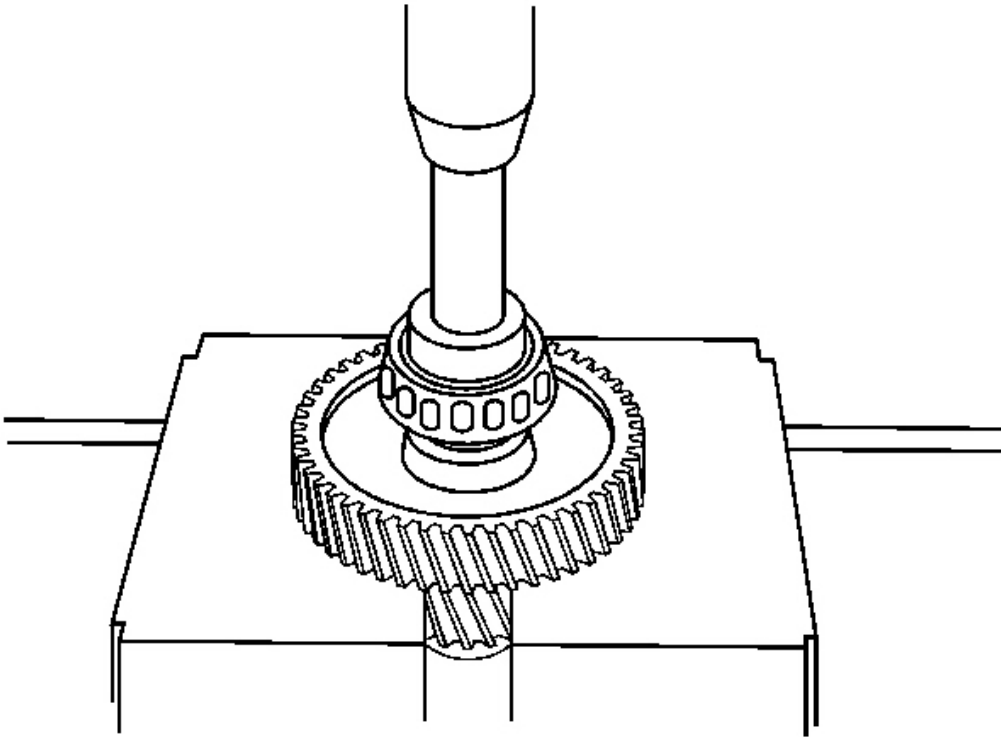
Tapered Roller Bearing & Transaxle Case Side
